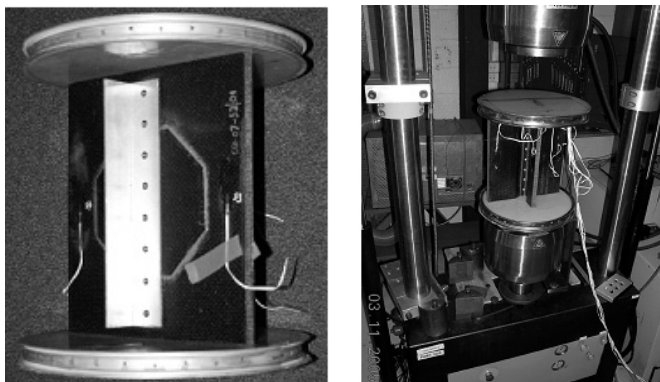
FSJ Specimen and compression test. The specimen ends were encapsulated in a resin casting. The encapsulation provides reinforcement to avoid premature failure of the specimen ends and helps smooth the load application.
